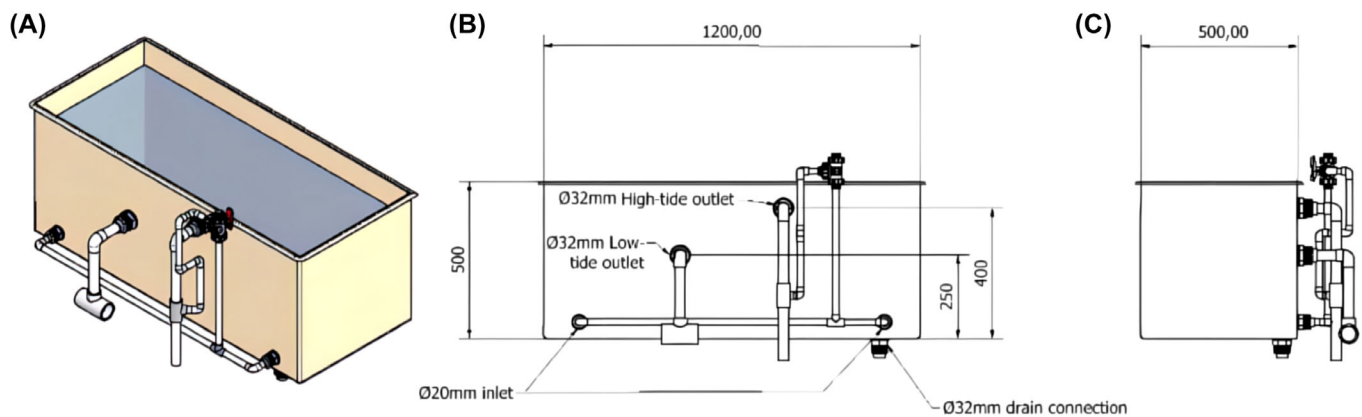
Schematic of a rearing tank (A: 3D drawing, B: long back side, C: short side) showing its dimensions (in mm), as well as the seawater inlets and outlets.
